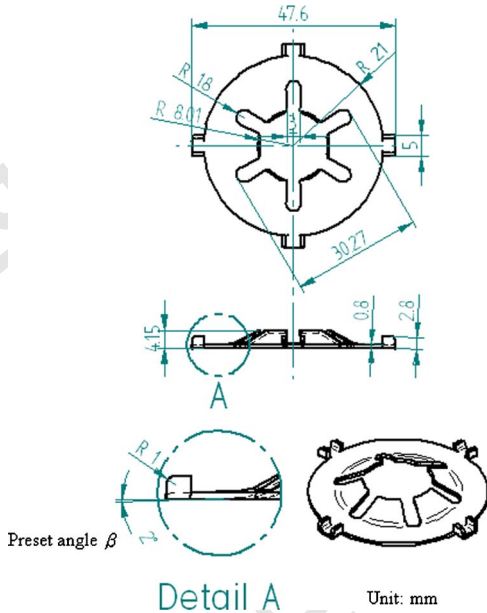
Dimensions of the prototype Belleville spring for experiment
